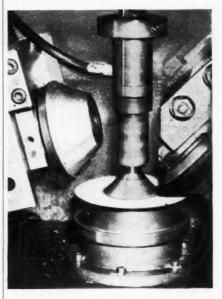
This roll for spinning cone-shaped units for cream separators was "tipped" with Carboloy cemented carbide. Whereas the formerly used rolls wore out so rapidly that they had to be changed every other day, this carbide-protected roll has been in operation for more than 100 consecutive days.
